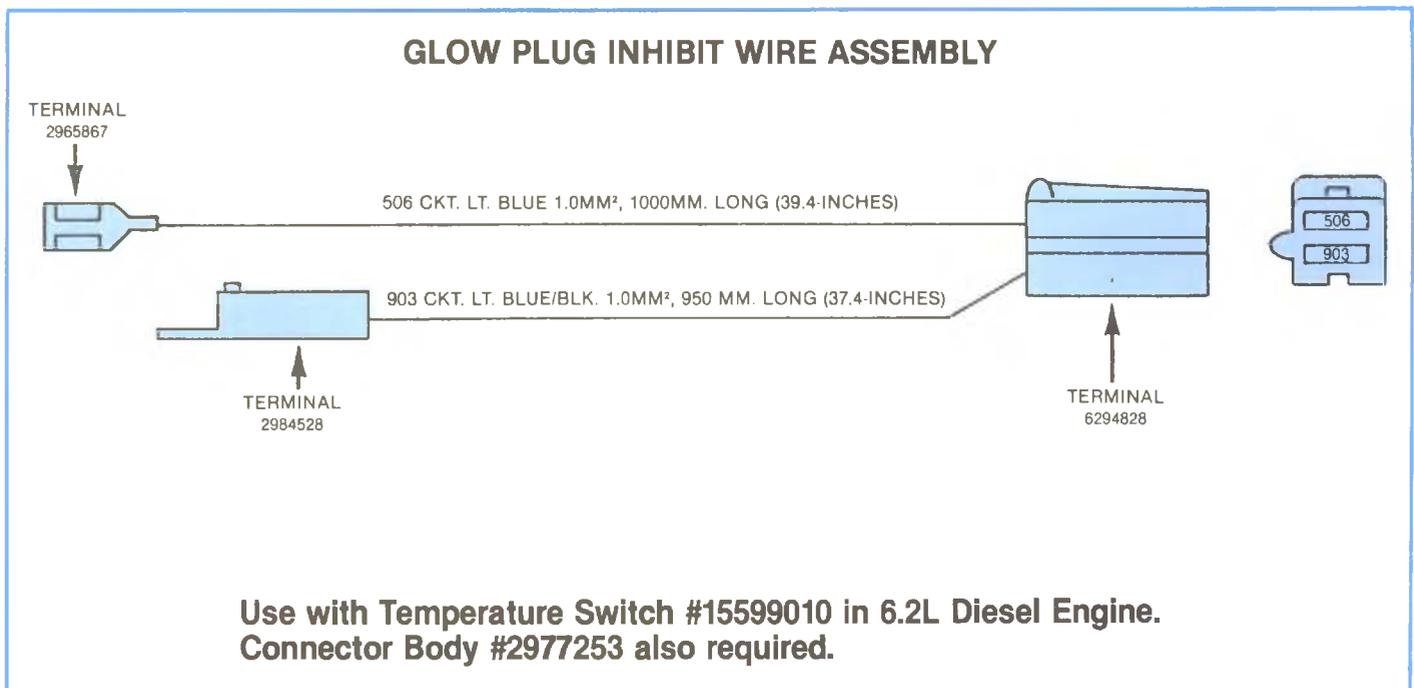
, Glow Plug Inhibit Wire Assembly.
